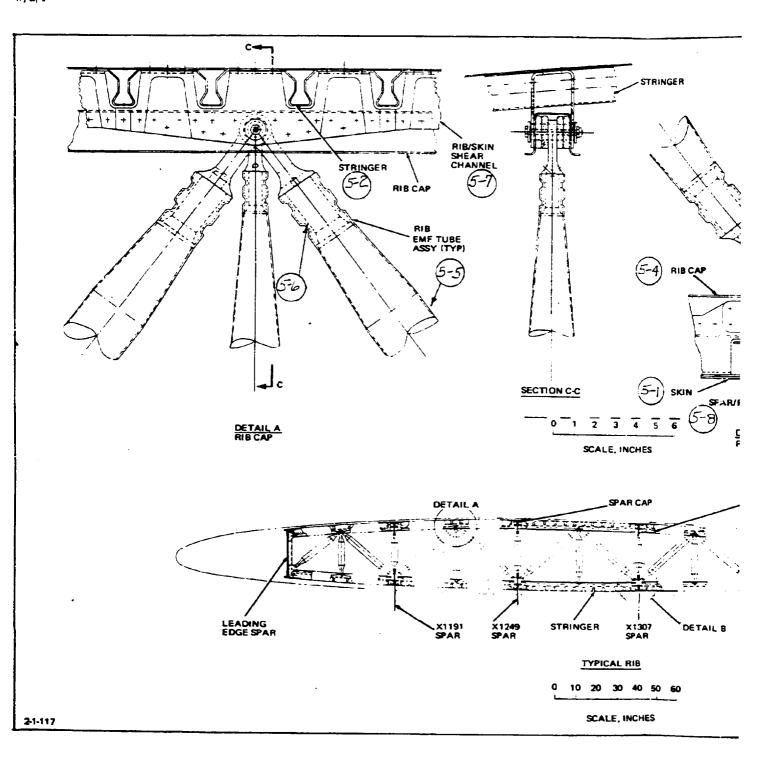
Wing Structure Subsystem Structural Arrangement
